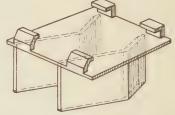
Cast iron bolted type rabble arm for Herre- Fig. 47a.—Rabble tooth used with shoff furnace.
